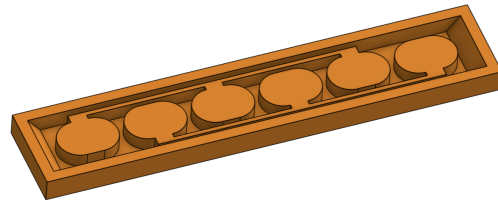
CAD model of version 2 of the soft pneumatic wheel top mold
